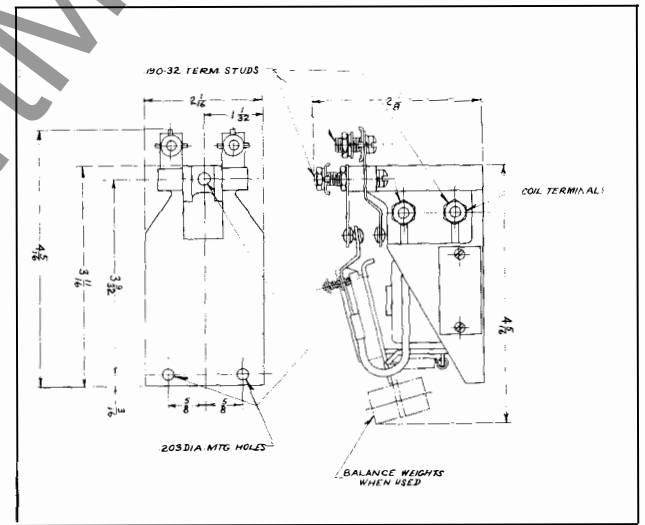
Outline and Drilling Plan for the 2-Make and 2-Break Contact Open Type SG Relay.
